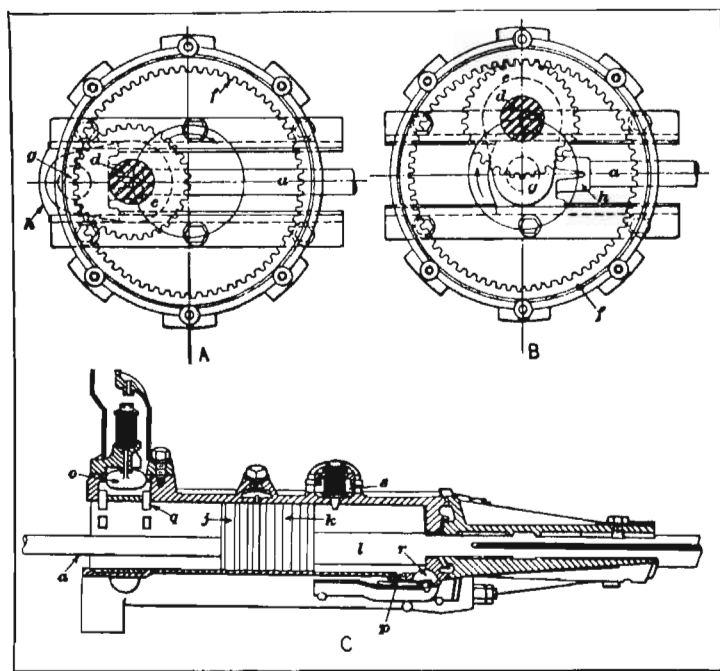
Epicyclic Gear and Crank Combination from which Reciprocating Motion is Derived
